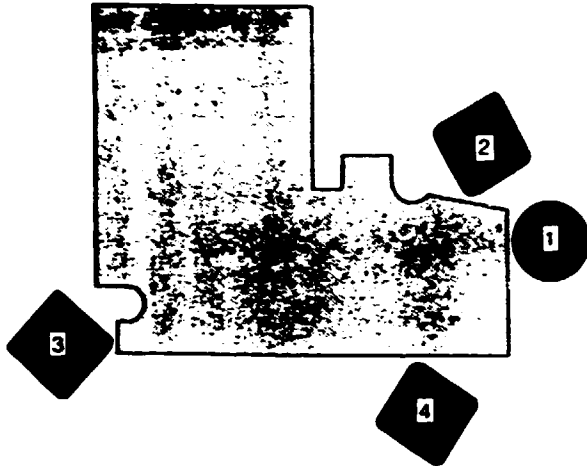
Second-speed gear for a manual transmission is machined in one hard-turning setup using four ceramic inserts. Bore and rear face are machined with double-tooled boring bar, the front face and tapered outside diameter by individual tooling blocks. Round insert machines front face, and bore is easily maintained concentric to pitch diameter. Front and rear faces are automatically parallel and square with bore, and tapered outside diameter (synchronizer cone) is automatically concentric to bore.
